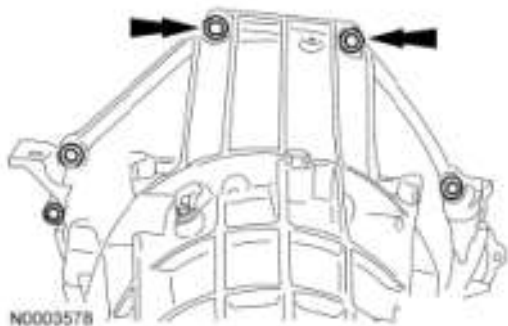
Locating Upper Transmission-To-Engine Bolts
